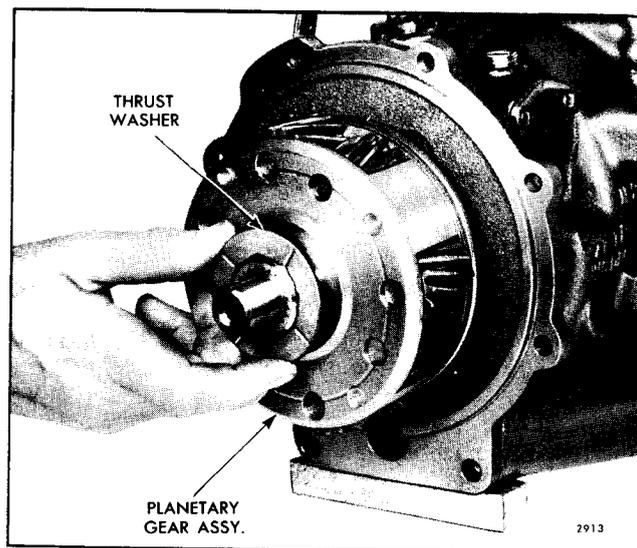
Installing Thrust Washer on Hub of Planetary Gear Assembly (2.1:1 Ratio)
